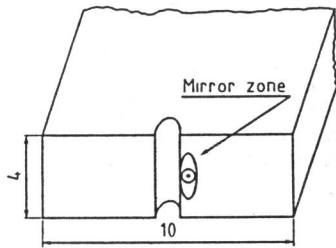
Schematic representation of fracture surface morphology near hole.
